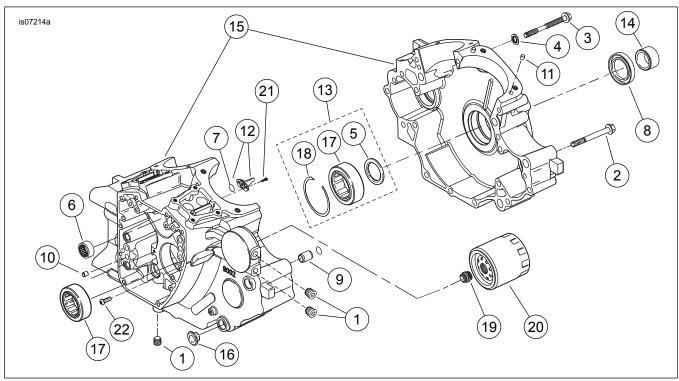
SE120R Screamin' Eagle Pro Crate Engine (Beta) Crankcase, Engine Oil Filter and Cooler
